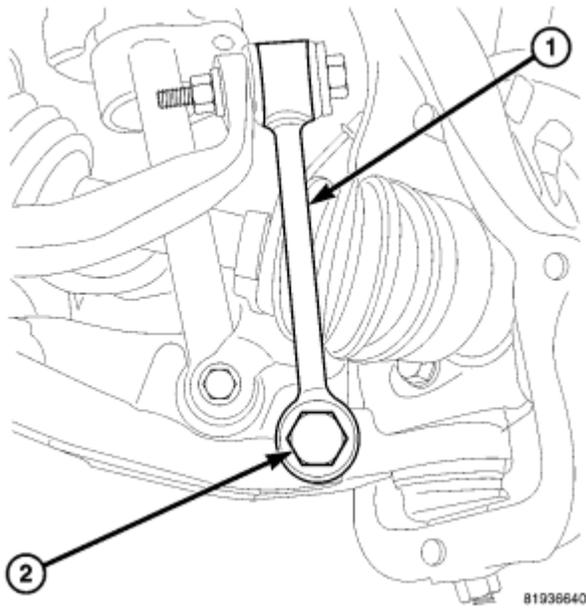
Identifying Stabilizer Bar Link & Bolts
